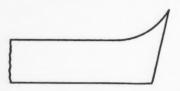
For turning copper a tool is used which has a built-up edge, extreme cutting rake, and plenty of clearance.
